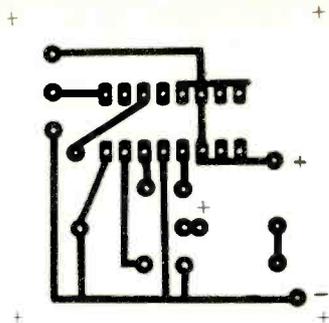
FOIL-SIDE VIEW of the printed-circuit board copper foil. This illustration can be used as a pattern for making yours. If you wish, use pre-etched standard-layout boards to construct the circuit and save the etching mess. Otherwise, you may consider wire-wrapping the circuit.
